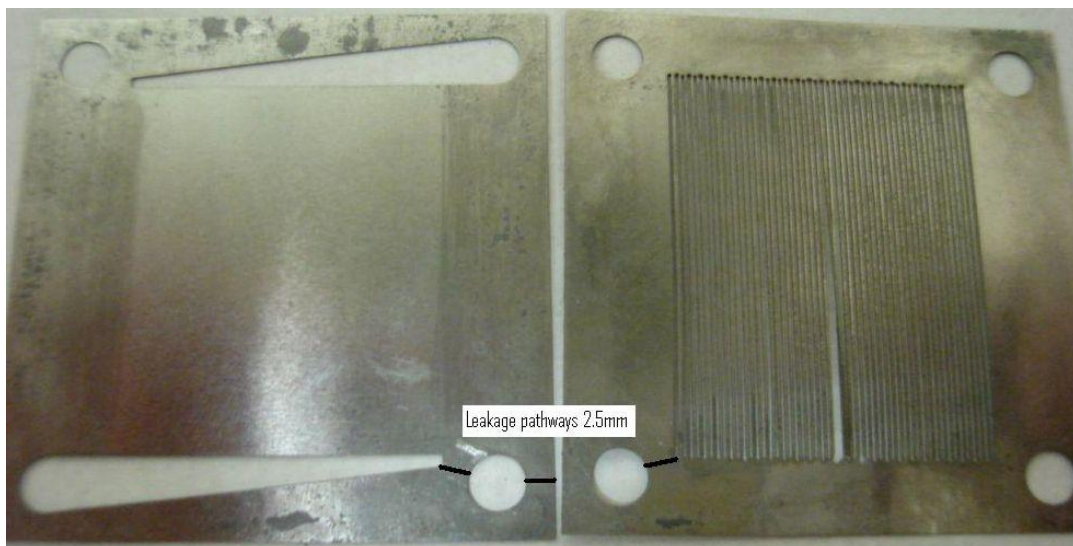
View of feed and reactor shims demonstrating smallest sealing faces
